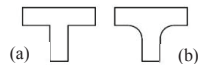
Internal corners of T crossings; (a) sharp; (b) with fillet.
